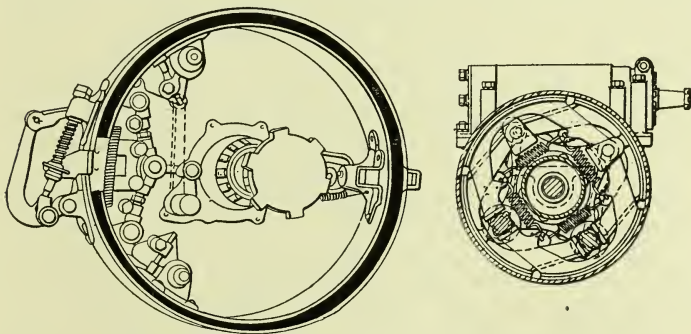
TWO FORMS OF AMERICAN TRUCK BRAKE
